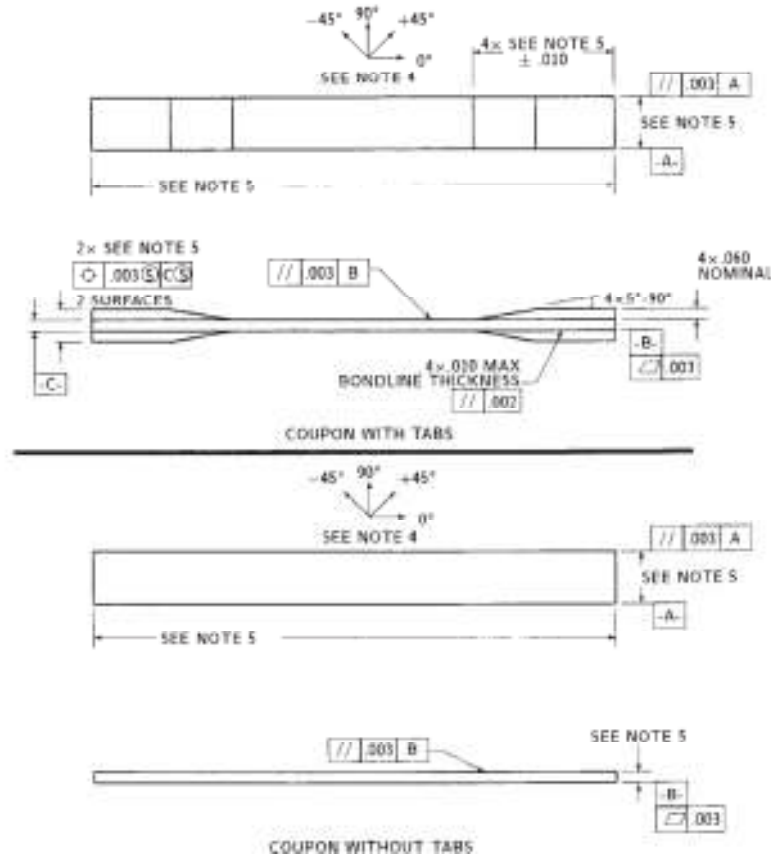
Tension Test Specimen Drawing (inch-pound)
